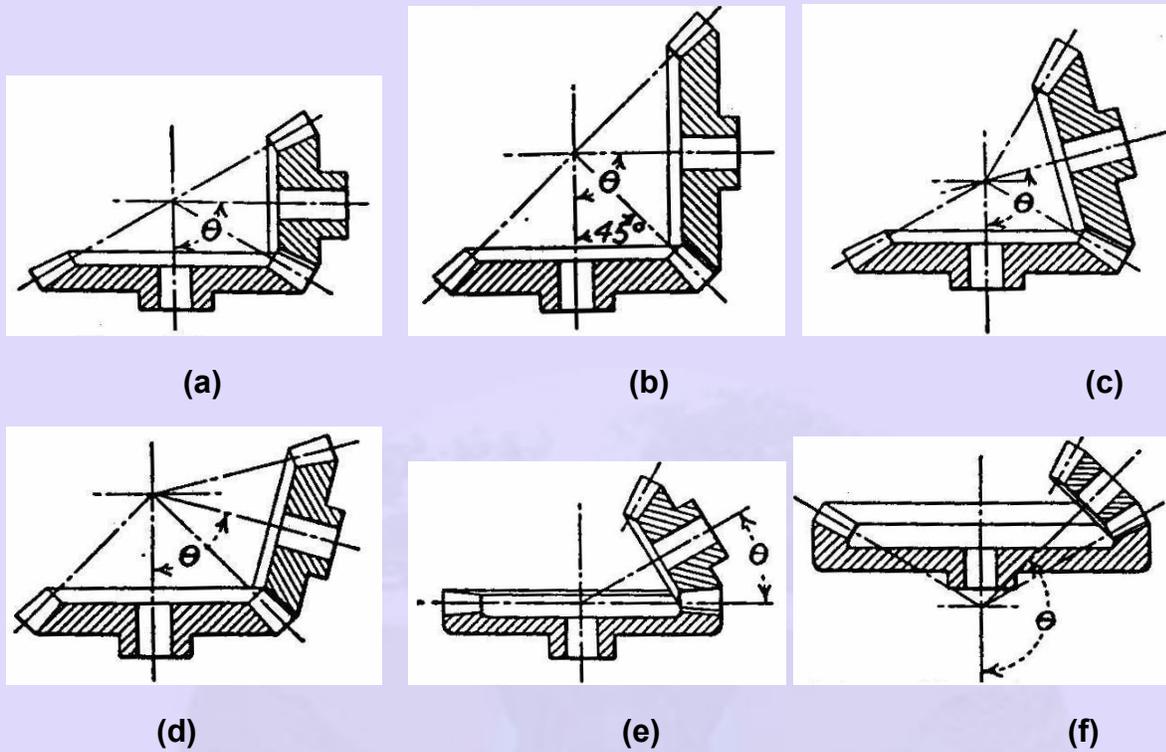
Different types of bevel gears (a) Usual form, (b) Miter gears, (c), (d), (e) Crown gear, (f) Internal bevel gear
